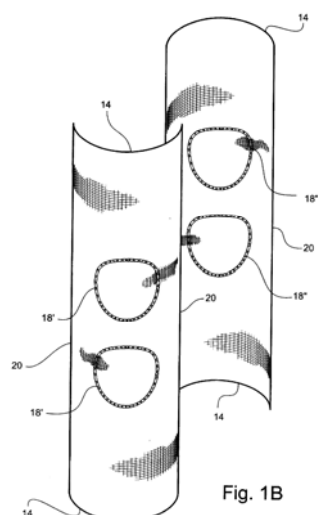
Separate panels of the bra blank (Albright & Rockingham, 1998)
